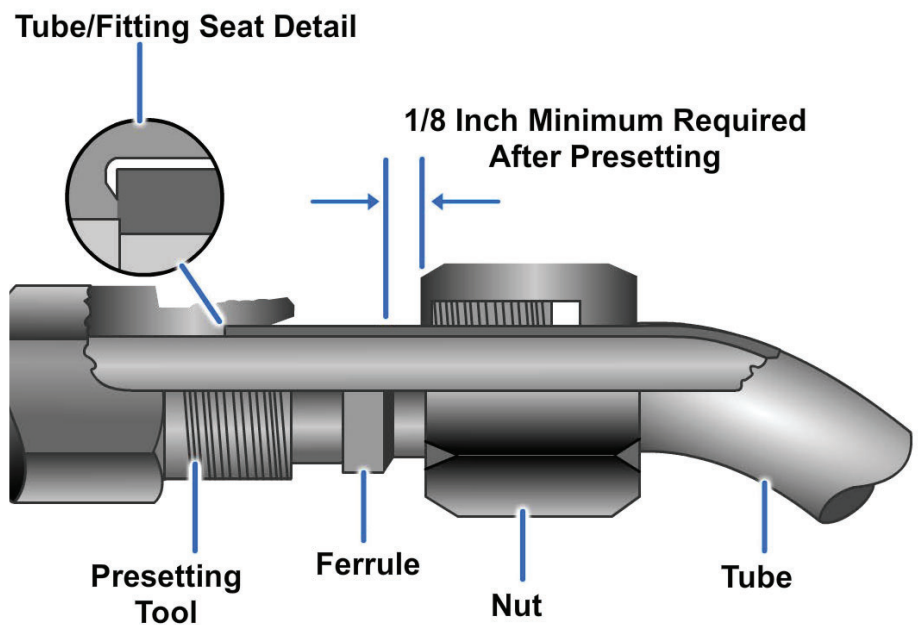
Tube and ferrule assembled for presetting, showing nut position required for inspecting ferrule.
